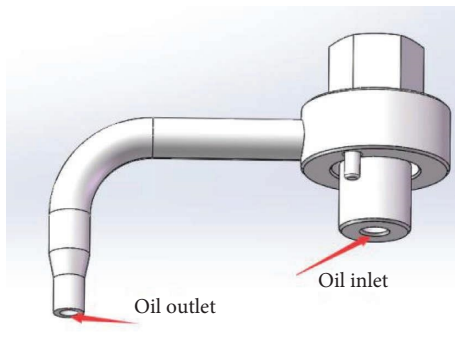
The three-dimensional model of the piston cooling nozzle.
